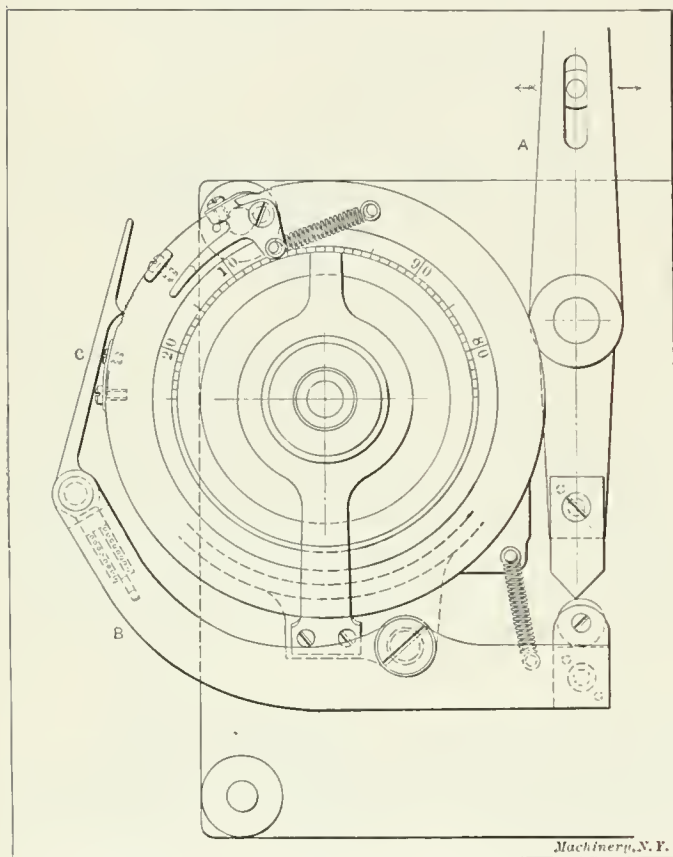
Combined Reversing and Feeding Mechanism for Grinding Machine
